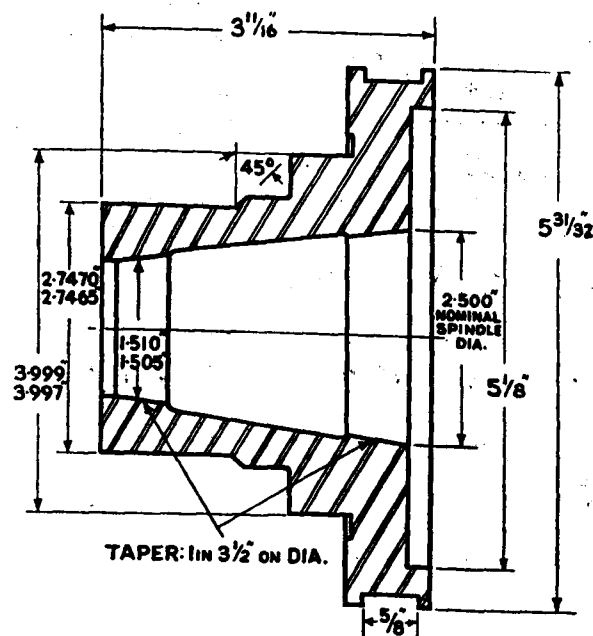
An excellent example of the savings to be effected in producing small batches on a Capstan Lathe. Twelve of these mild steel grinding wheel flanges were produced in less than a third of the time taken on a Centre Lathe.
